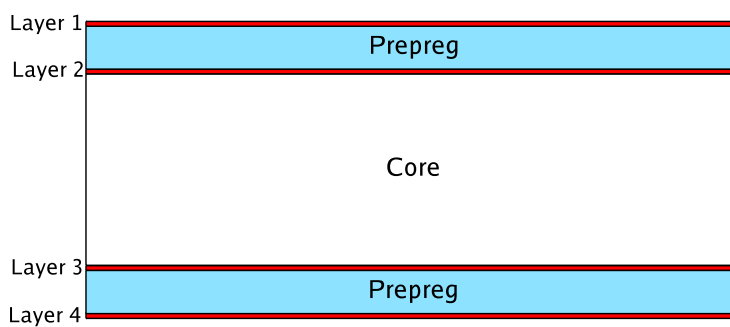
Four layer PCB construction. Note the core is thicker than the prepreg layers.
